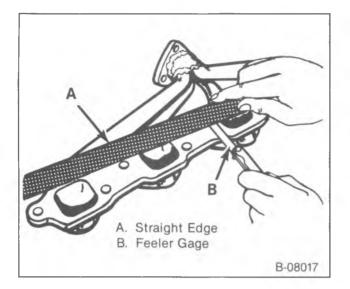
Checking Alignment of Manifold Flanges (Typical)
